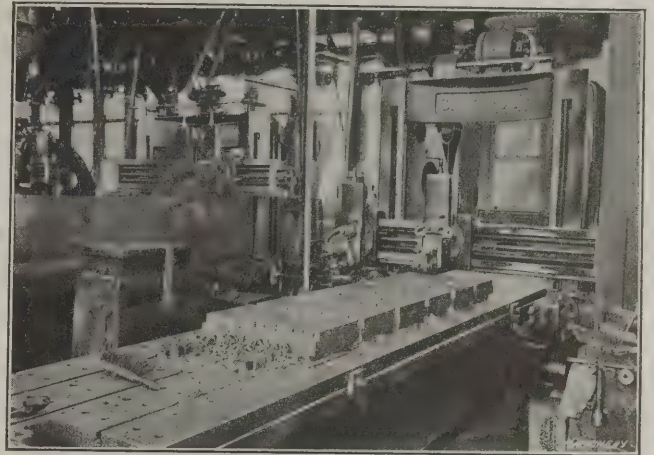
Planing Teeth in Steel Racks for Frog and Switch Planers
